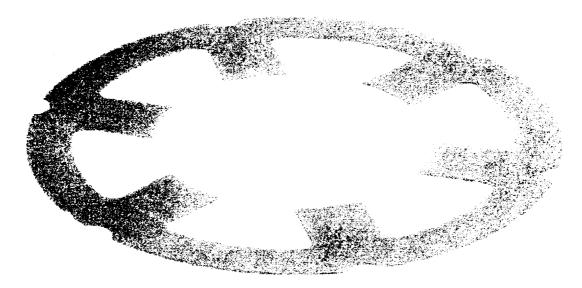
Stator section of Switched Reluctance Motor stamped from sheet steel.
